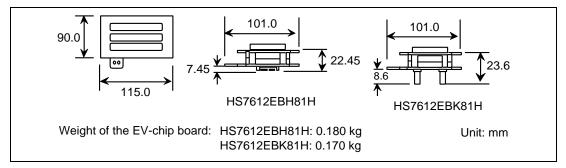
External Dimensions and Weight of the EV-Chip Board
